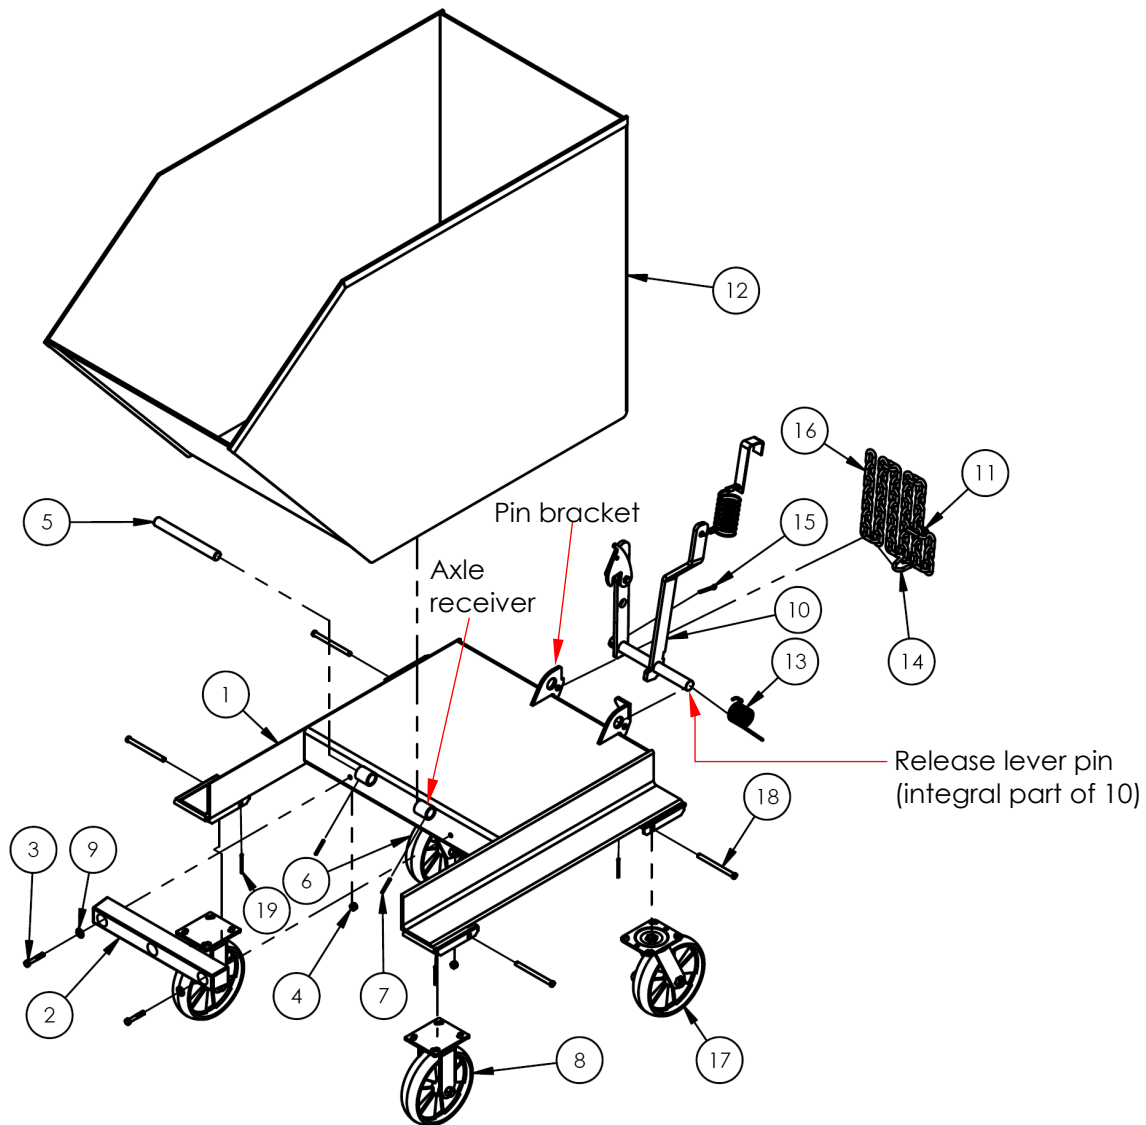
P-HOP-0.5 EXPLODED VIEW AND BILL OF MATERIALS (37-006-003)
